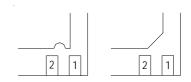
PCB Layout Guide for WDFN-10L 3x3
